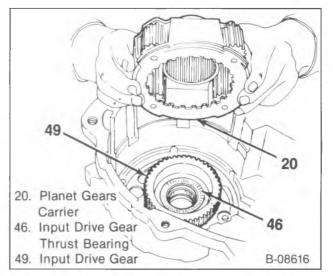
Input Gear, Mainshaft Thrust Bearing, and Planetary Gear Installation
